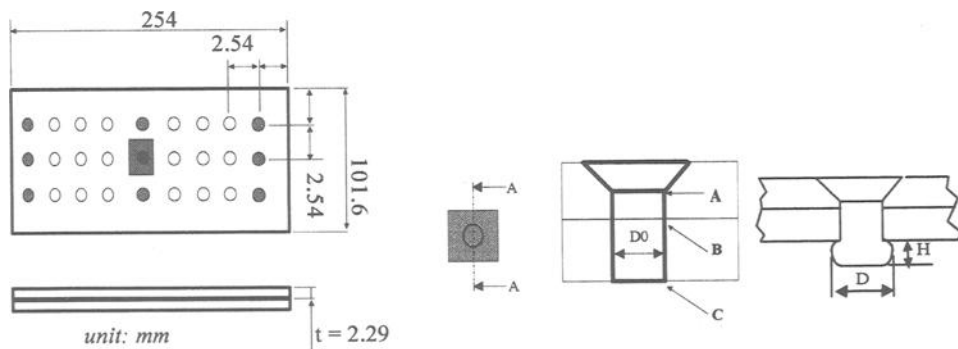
Specimen setup for hole expansion measurement (dimension in mm).
